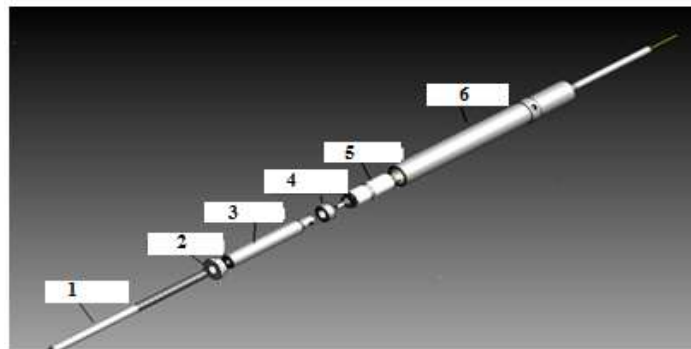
Exposed view of prototype version of the SGRD: (1) threaded rod (2) cap (3) collar (4) thrust bearing (5) motor (6) casing.
